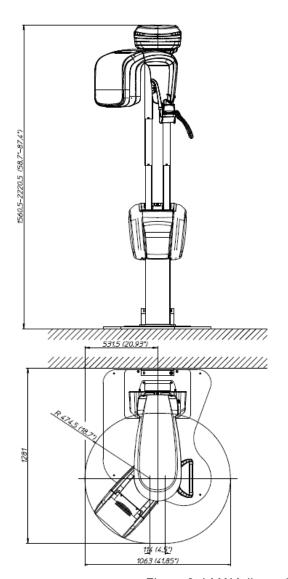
I-MAX dimensions - Wall mounted with floor support version
